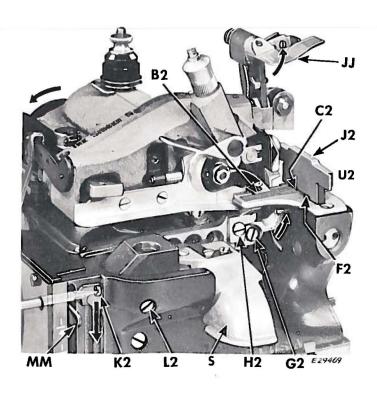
Setting the Feed Dog (Cloth plate and presser foot have been removed for purpose of illustration, only.)
